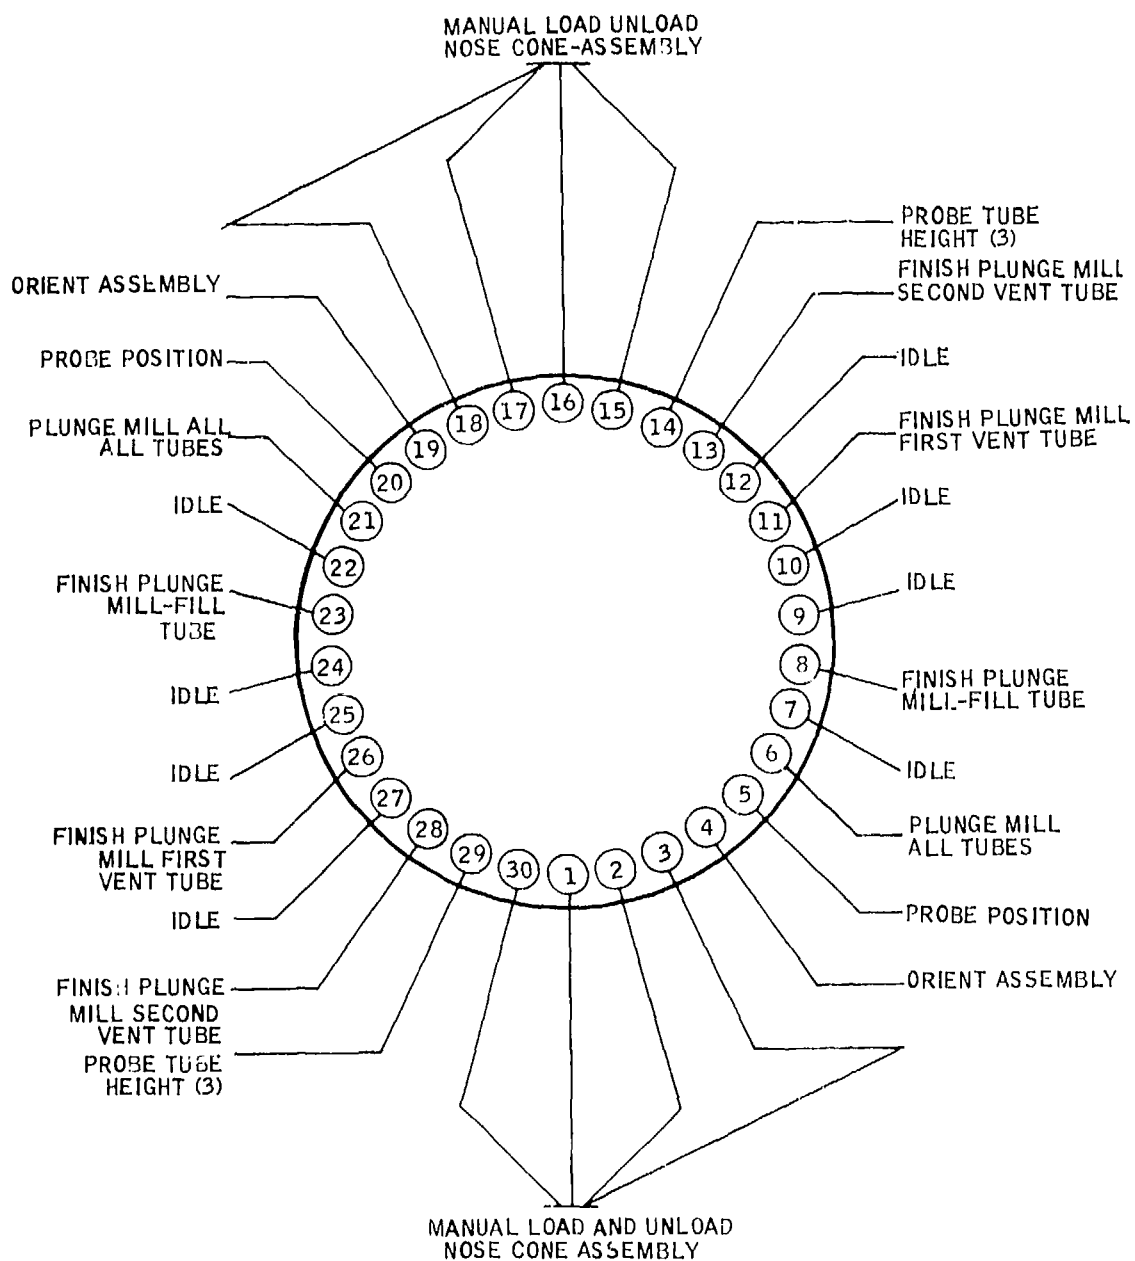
Dial schematic, machine E4 - nose cone trim machine
